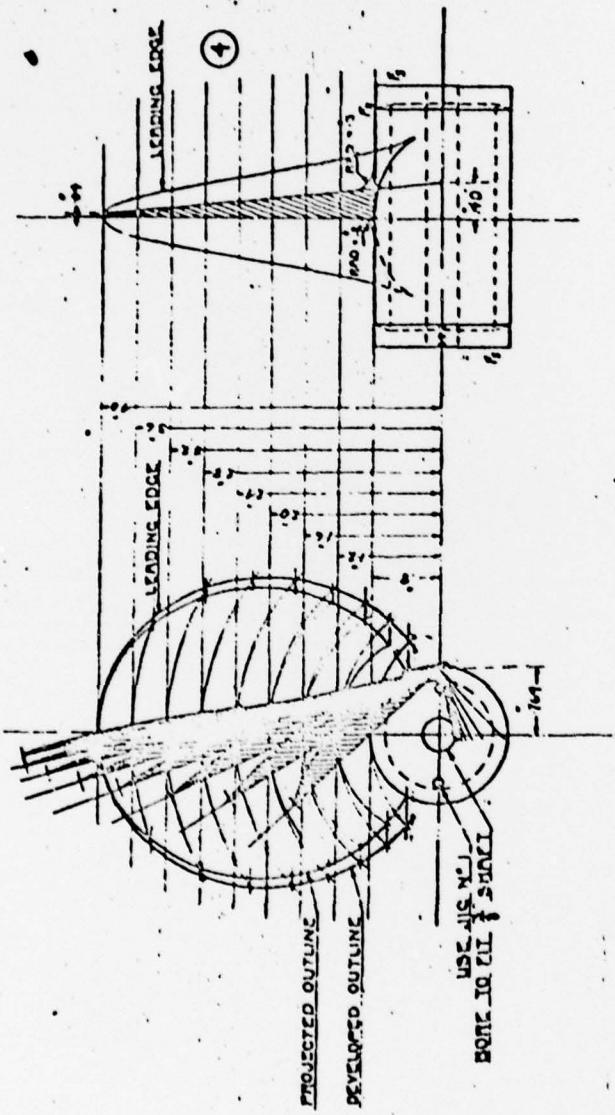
Drawing for Propeller 829 - $P/D = 0.6$
